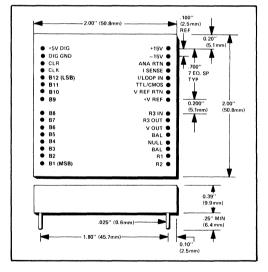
MP1480S Outline Drawing, Mounting Dimensions and Terminal Identifications.
